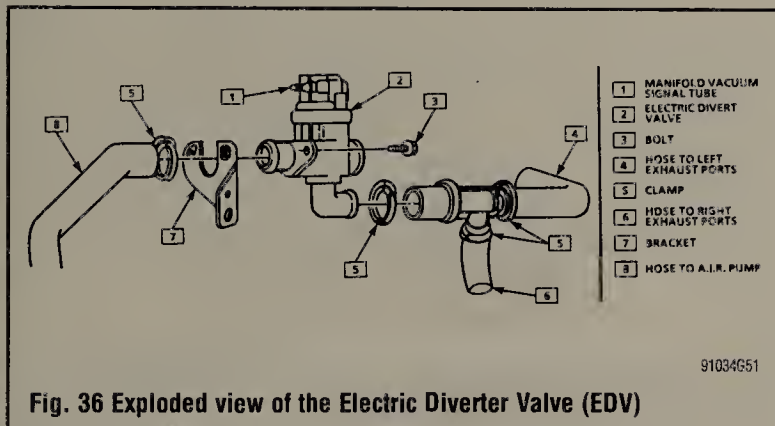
Exploded view of the Electric Diverter Valve (EDV)
